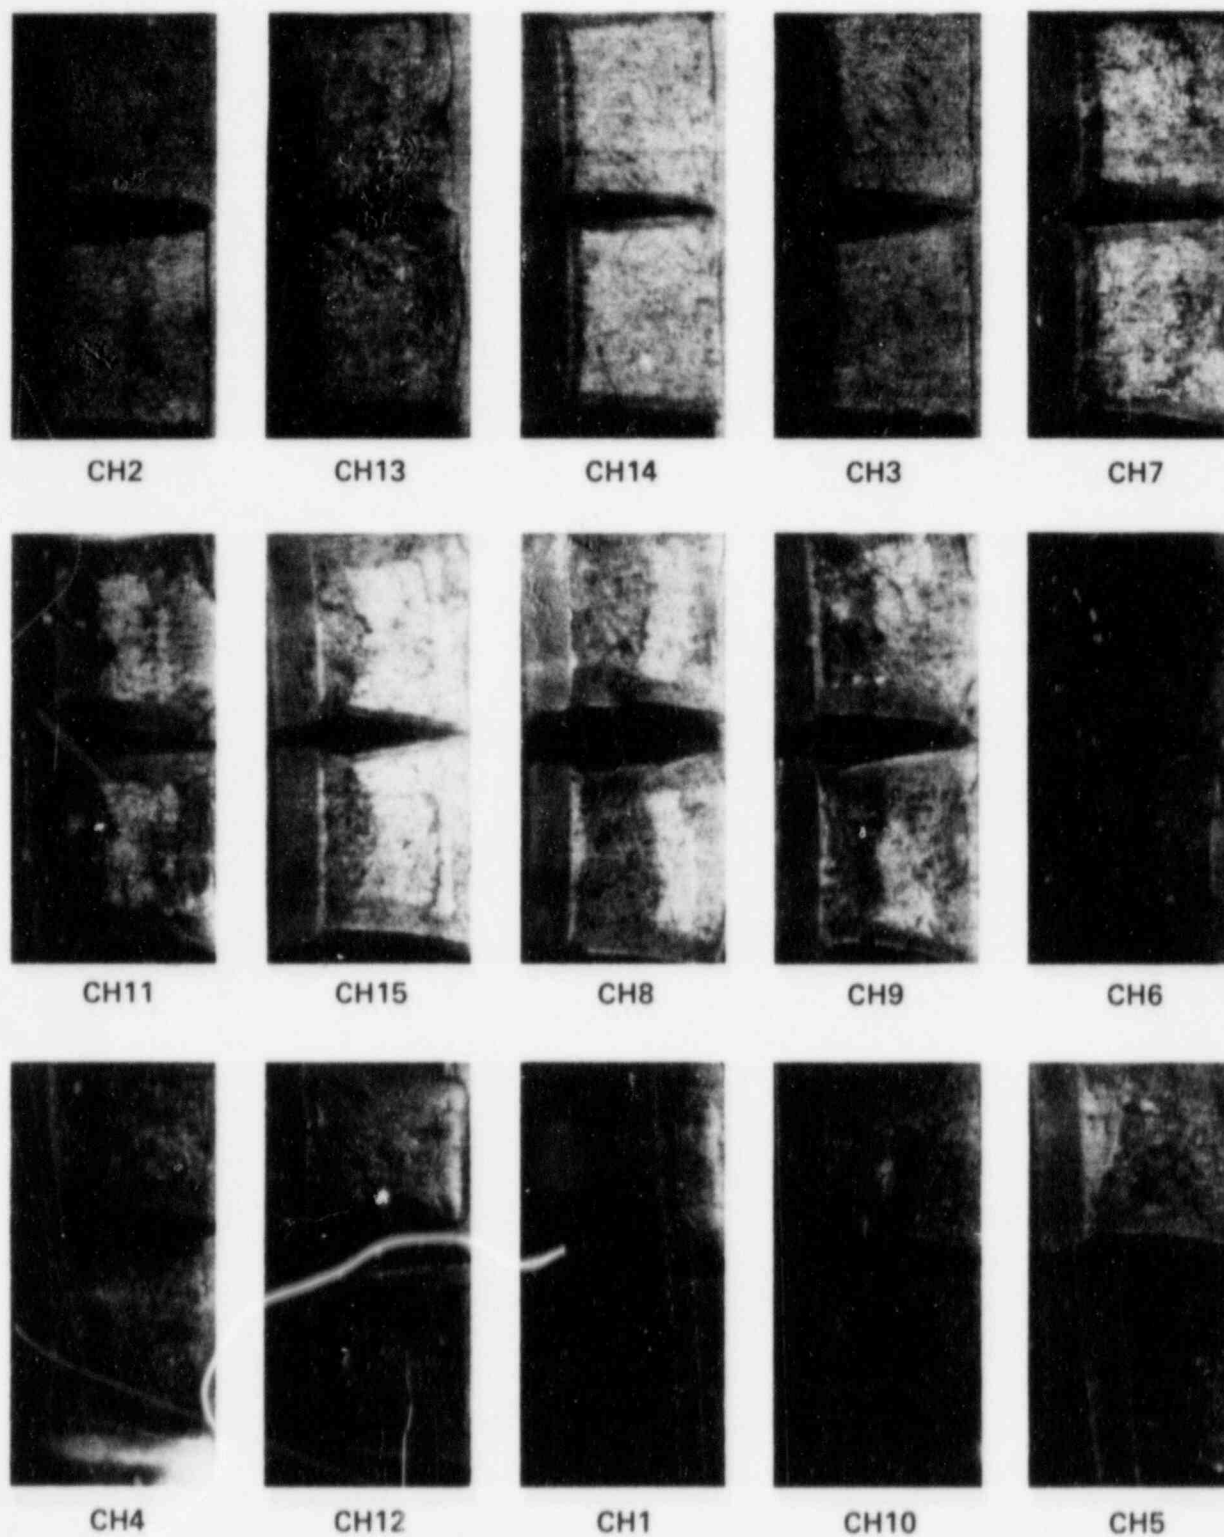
Charpy Impact Specimen Fracture Surfaces for V.C. Summer Unit 1 Weld Heat Affected Zone Metal
